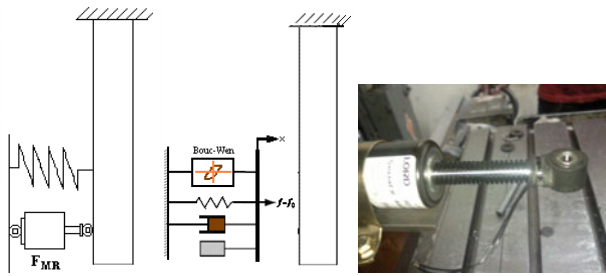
Allocation of MR Damper at the tool tip and Bearing placed at eye end of damper
